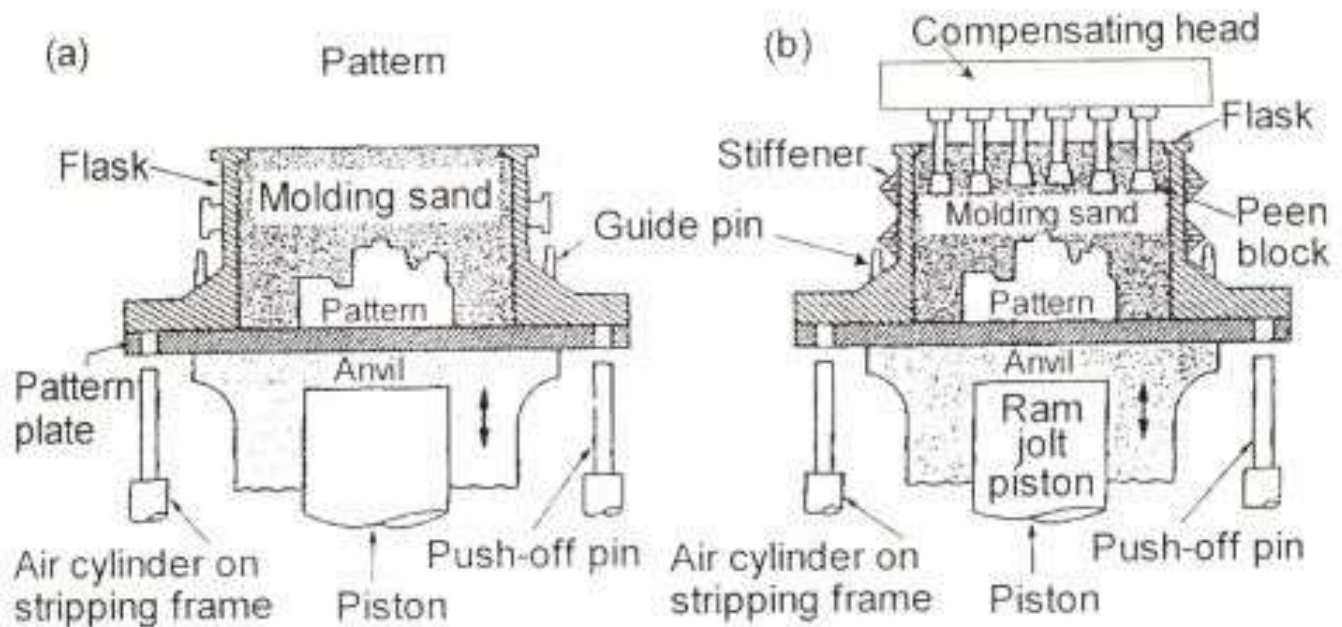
(a) Schematic illustration of a jolt-type mold-making machine. (b) Schematic illustration of a mold-making machine which combines jolting and squeezing
